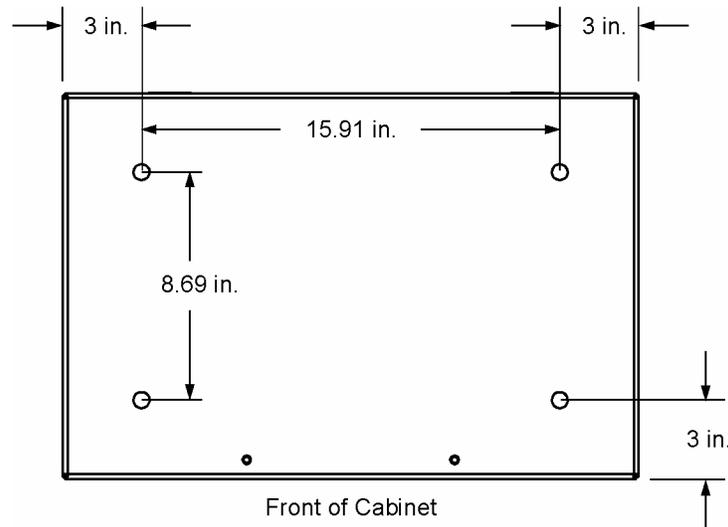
G18/G19 Cabinet Mounting Footprint
